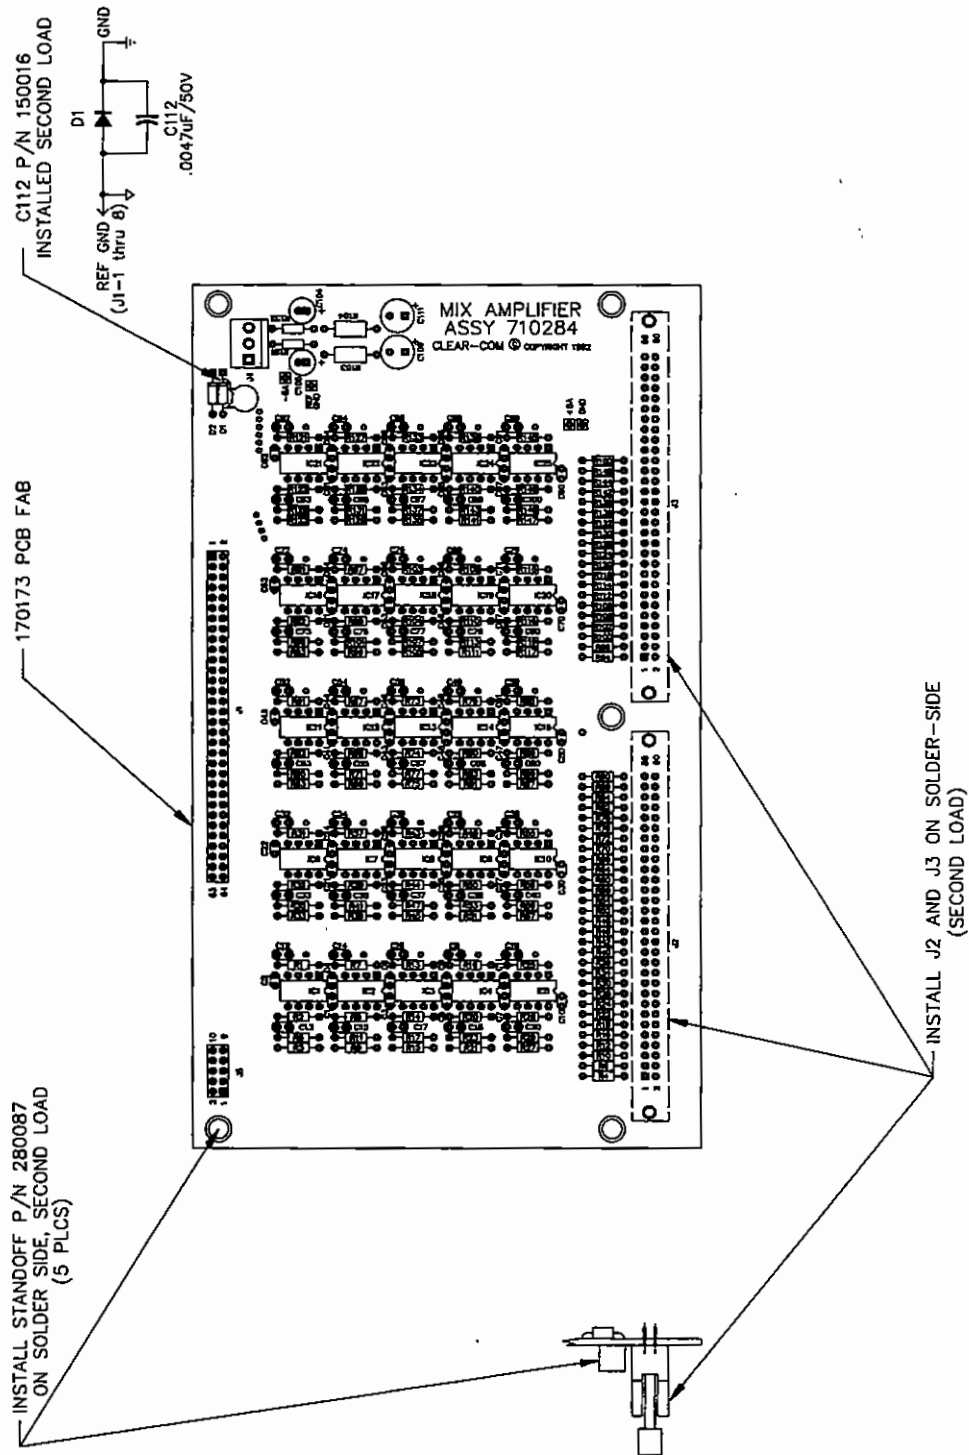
Assembly Drawing - Mix Amp PCB, Rev. B
